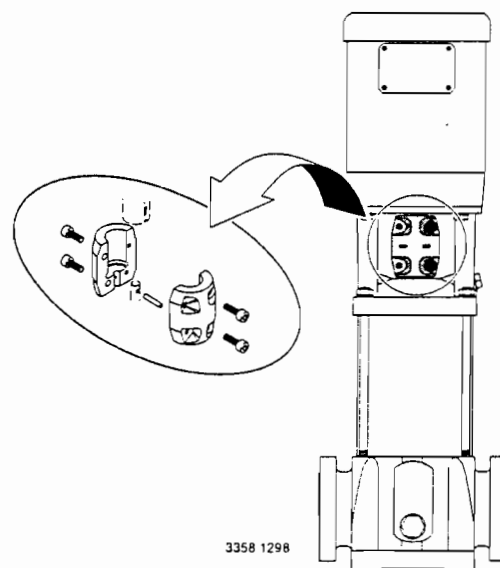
Remove the Socket Head Screws and the Coupling Halves
